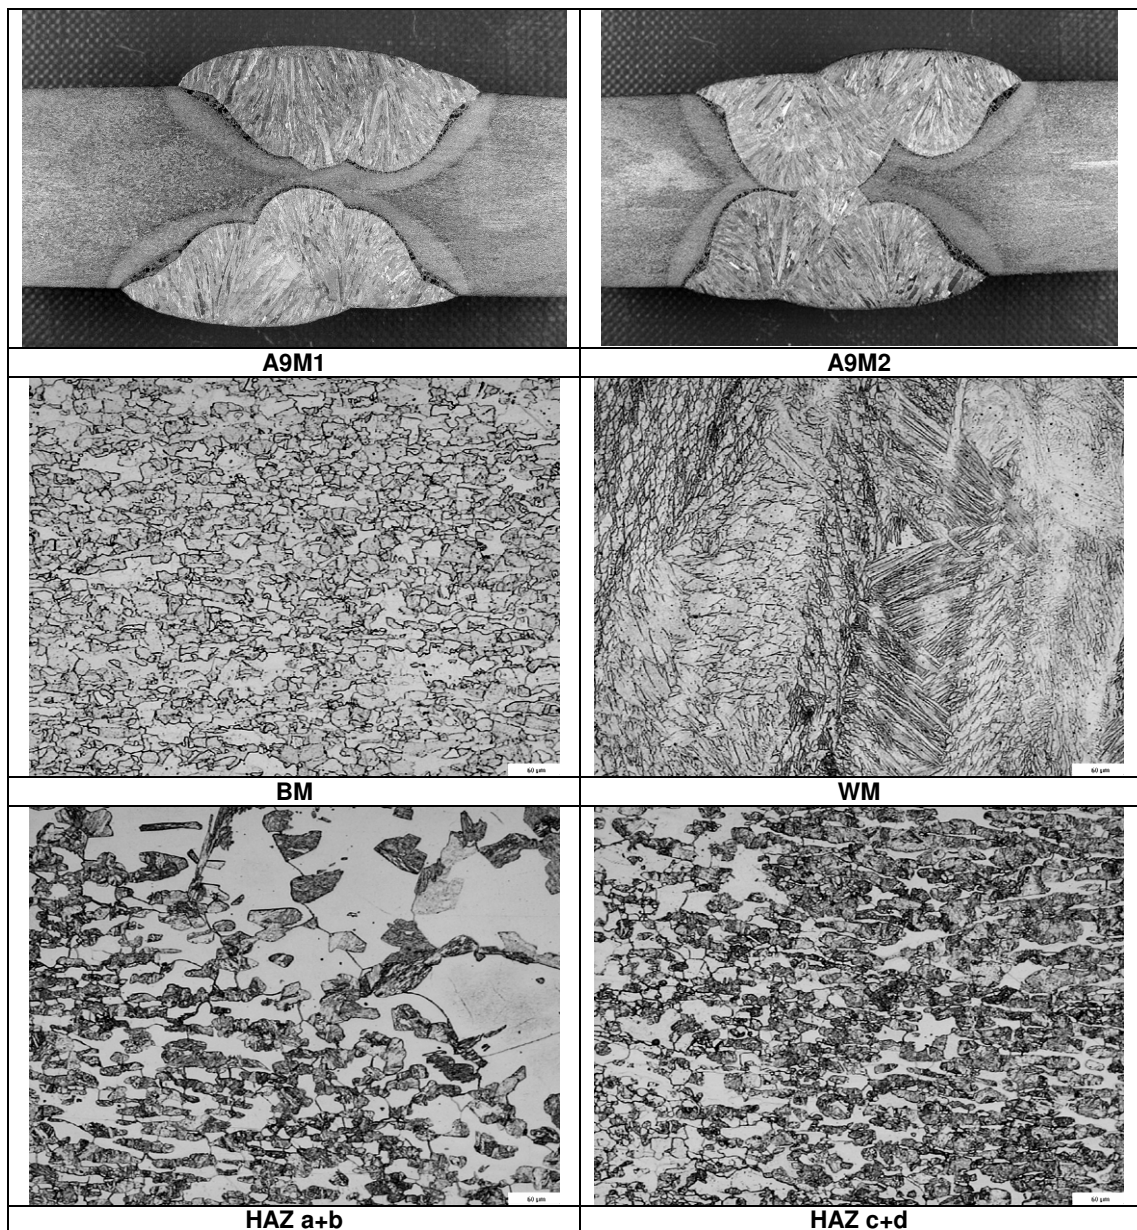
Macro and microphotographs of 20 mm thick SAW weld with 309 filler metal (A9).
